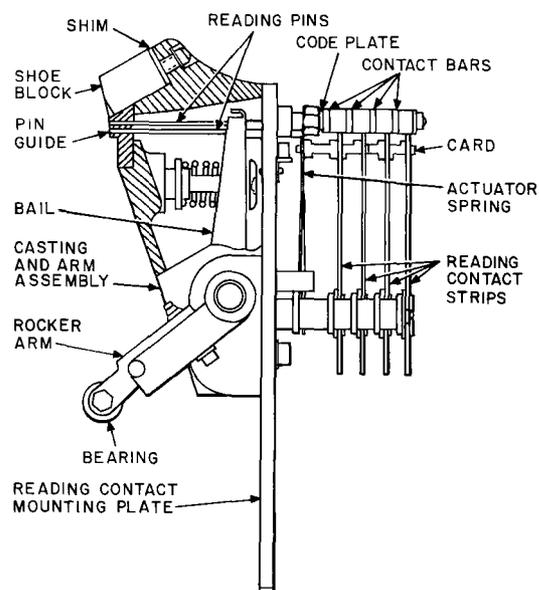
Sectional View of Reading Contact Assembly and Associated Parts
